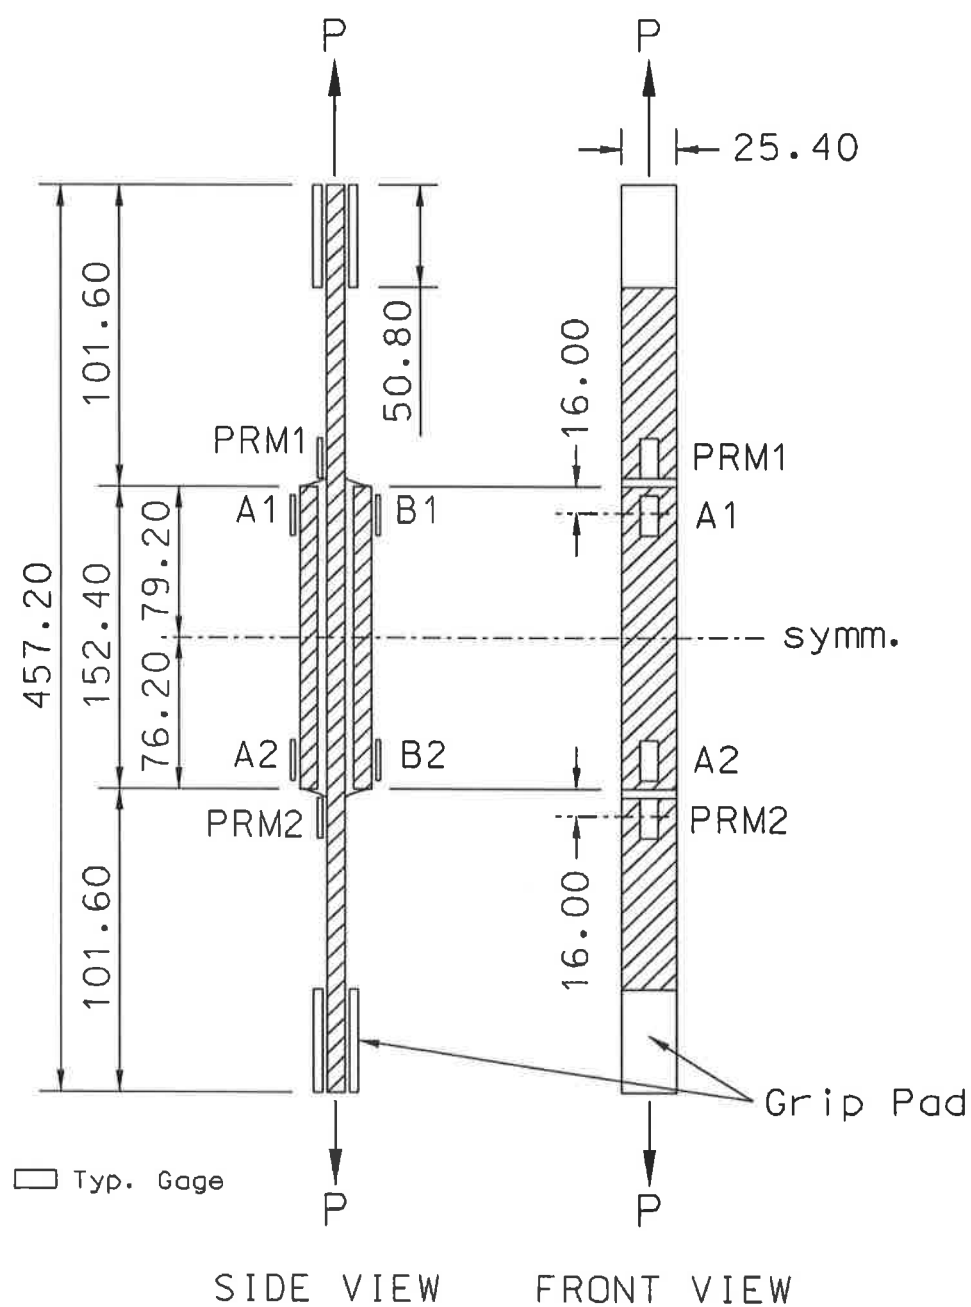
Tension Test Specimen Geometry, Strain Gage Locations, and Applied Load
